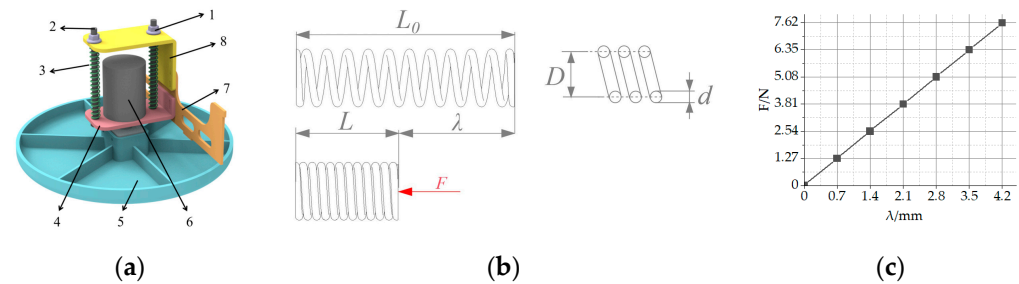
Cleaning institutions. (a) Clean model: 1—nut; 2—bolt; 3—compression spring; 4—support plate; 5—cleaning disc; 6—electrical machinery; 7—side panels of the main frame; 8—external extension plate; (b) Spring compression principle; (c) The relationship between spring elasticity and compression.
